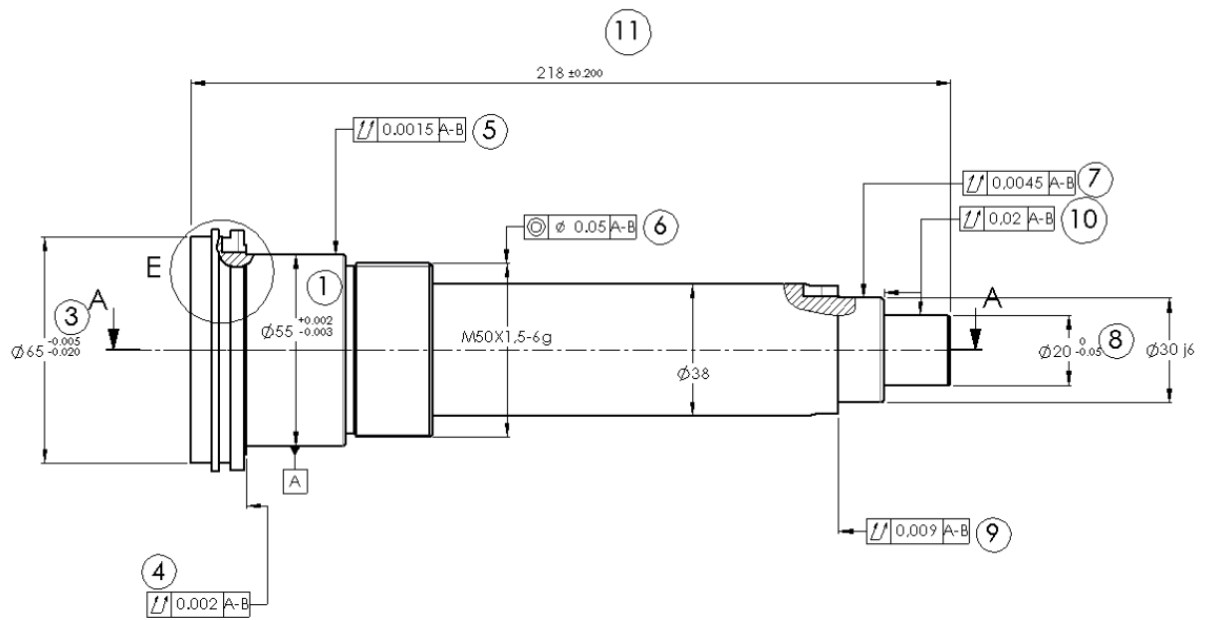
Geometrical tolerances and dimensions to be measured on the shaft
